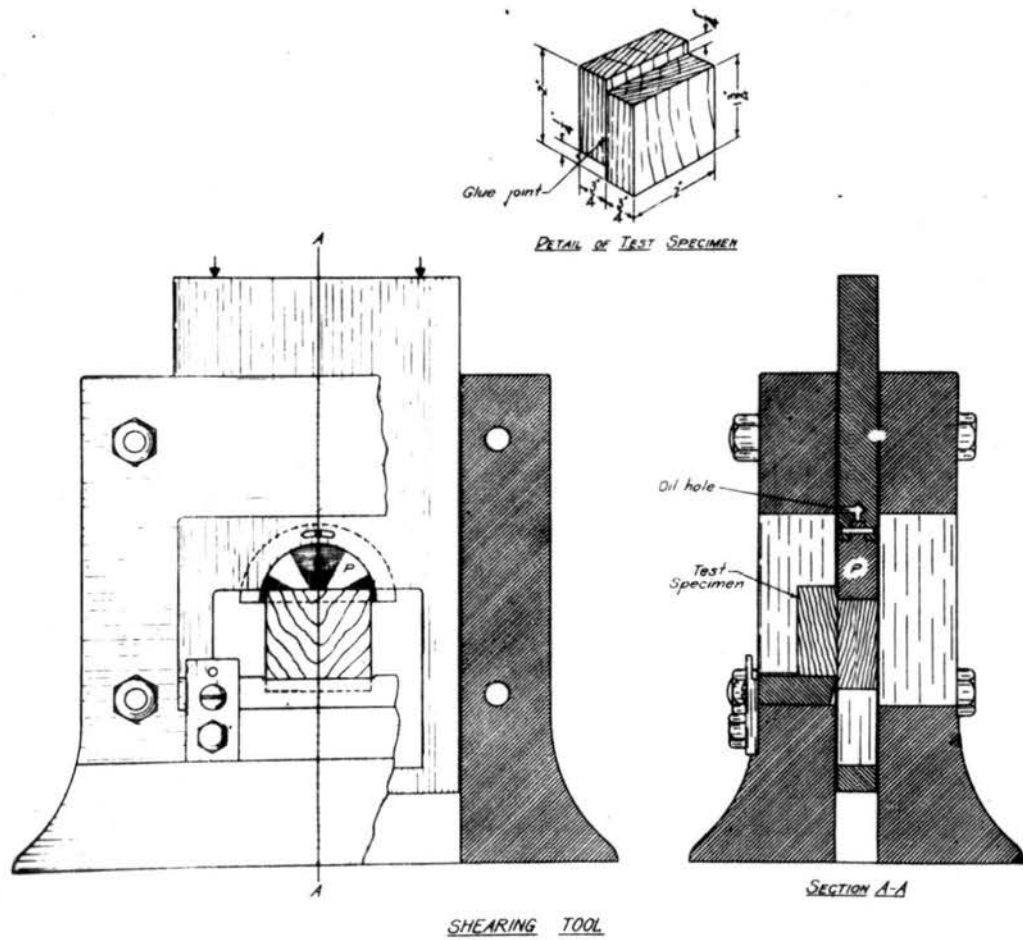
Specimen and shearing tool used in the block-shear test (20).
